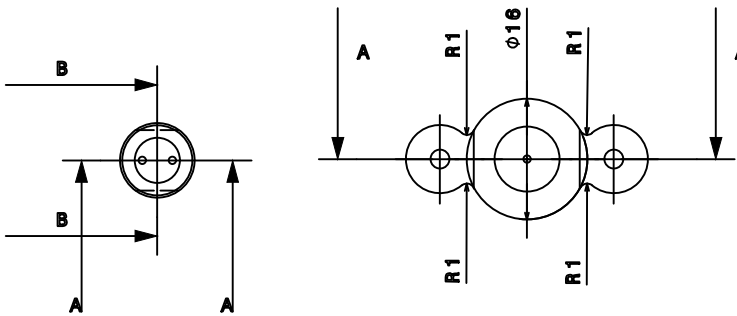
Technical drawing: top view. Bottom part (left), top part (right).
